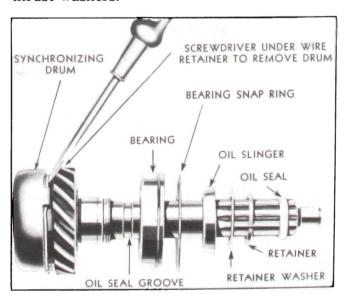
Disassembly of Main Drive Gear—Series 40-50
